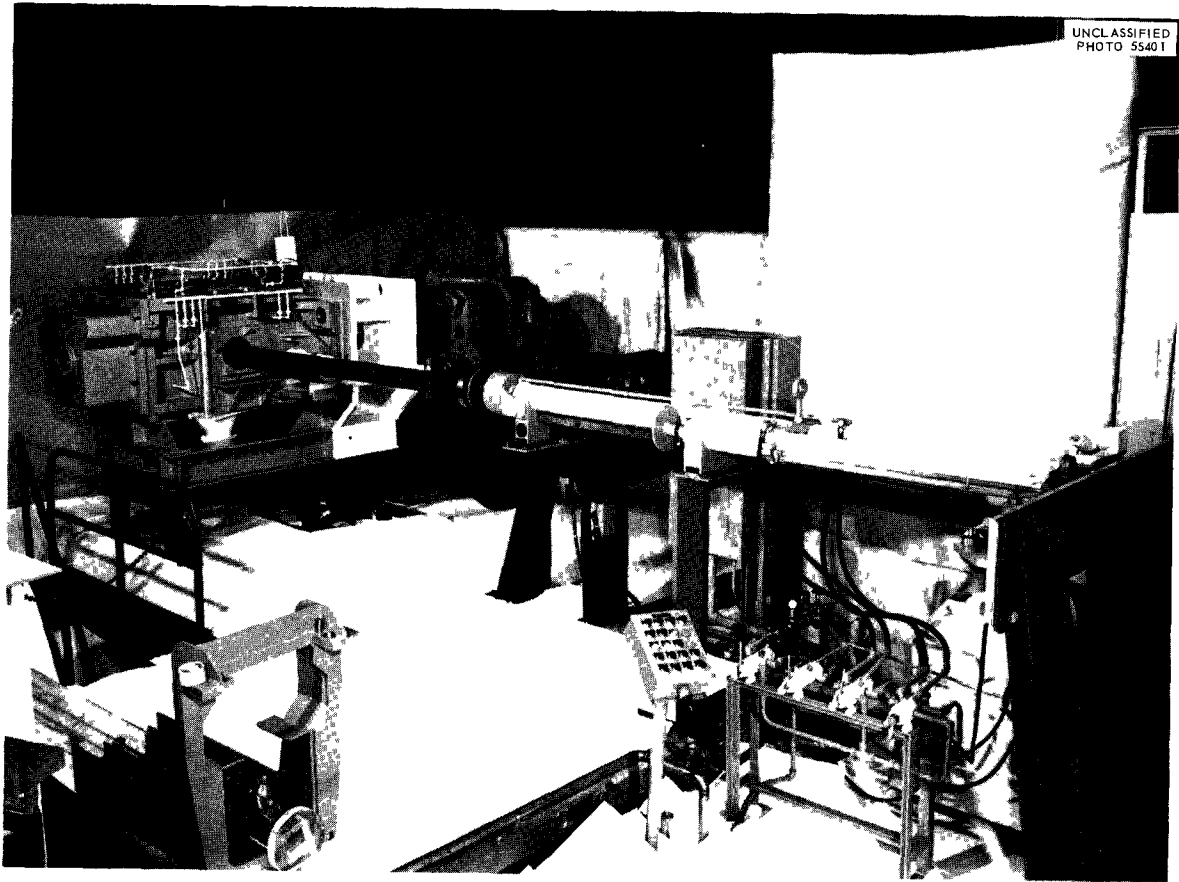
18. 250-ton Prototype Shear and Feed Mechanism.
